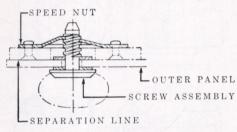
In the Southco No. 2 fastener, the screw assembly shown above is designed so that it does not come loose from the panel when the fastener is disengaged. Note a Speed Nut is riveted to the back side of the second part to be joined, engaging and locking the screw against vibration.
